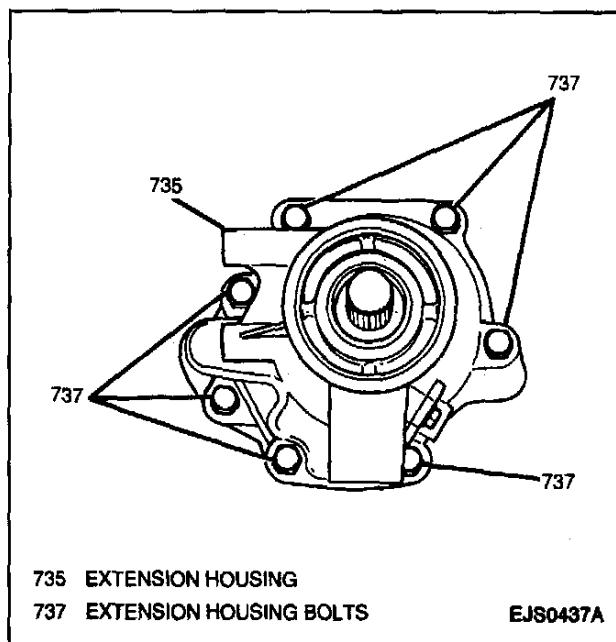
Extension Housing Bolts (3L30, 3-Speed)
